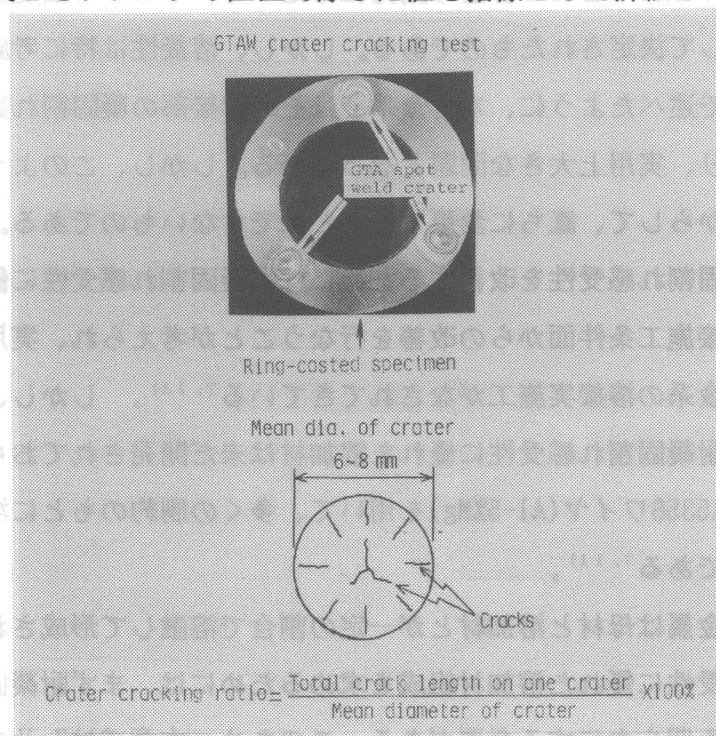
General appearance of GTAW crater cracking test specimen.
